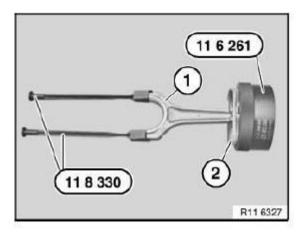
Identifying Piston And Connecting Rod Courtesy of BMW OF NORTH AMERICA, INC.
